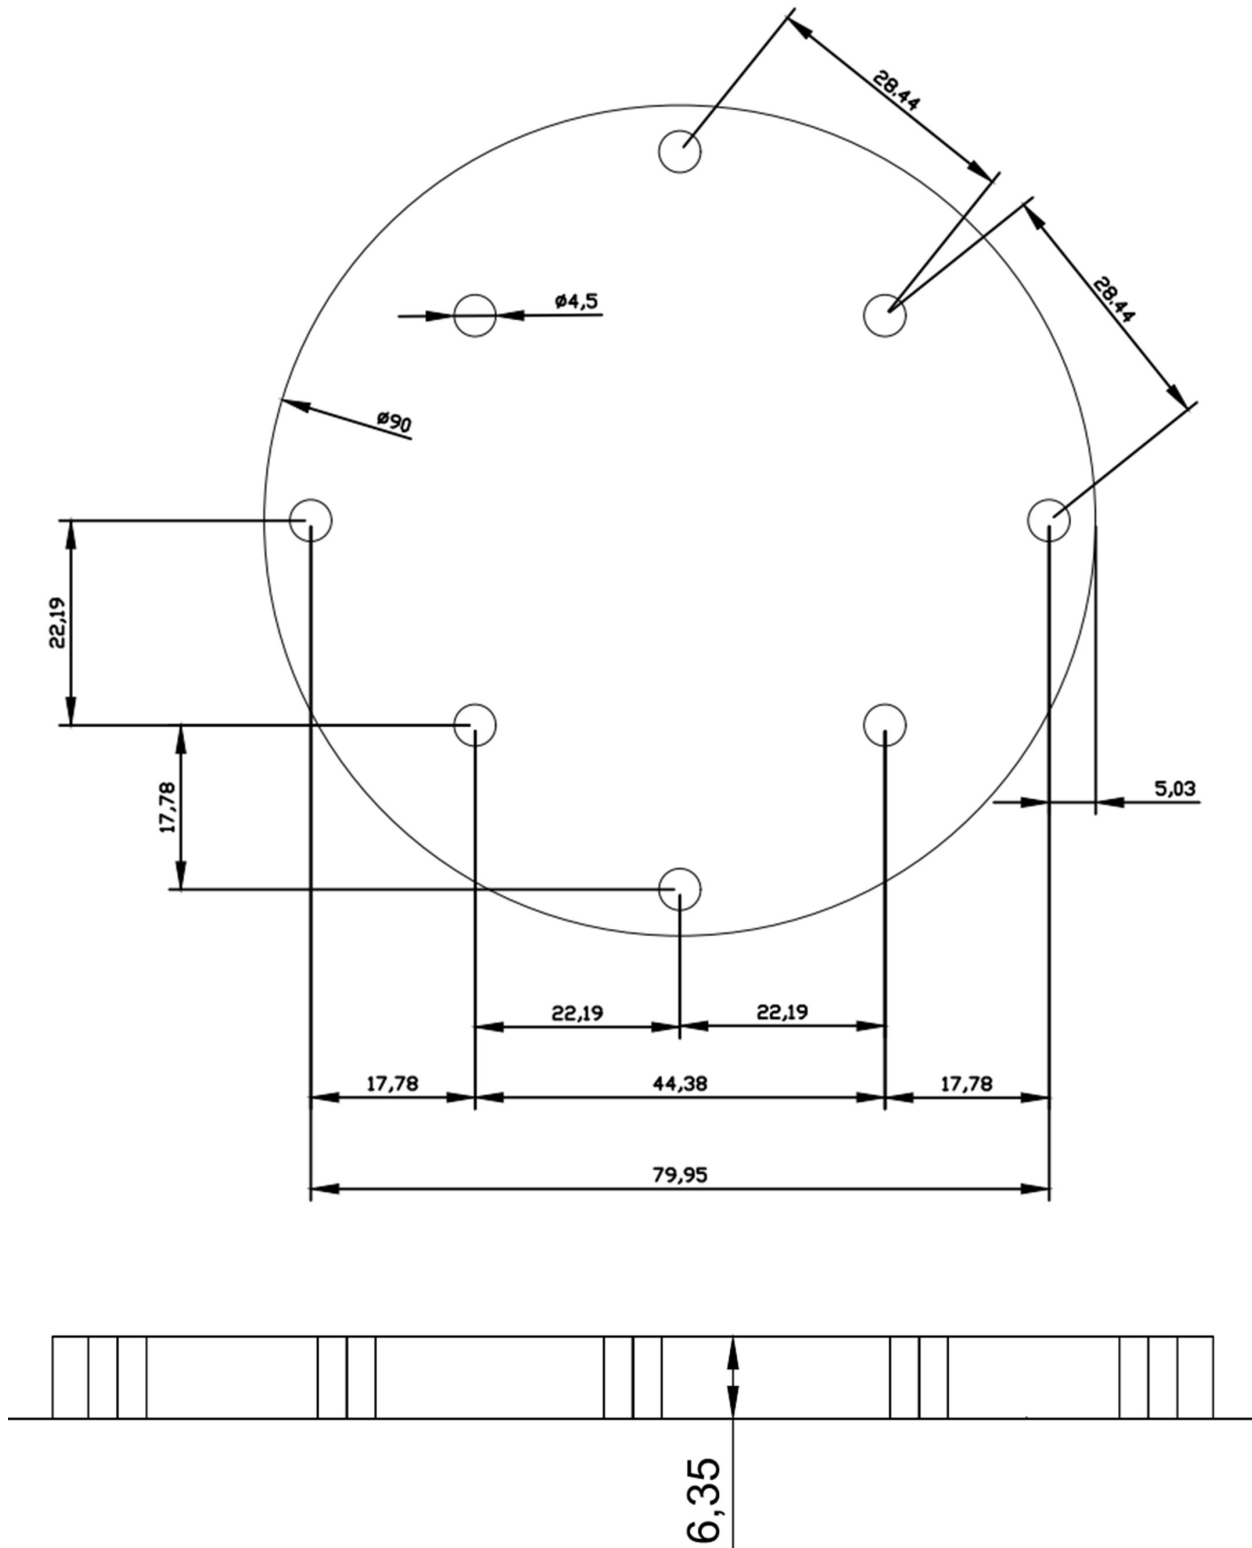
Updated CAD design for bottom piece of bonding apparatus with 5 plungers. Sizes are in mm.
